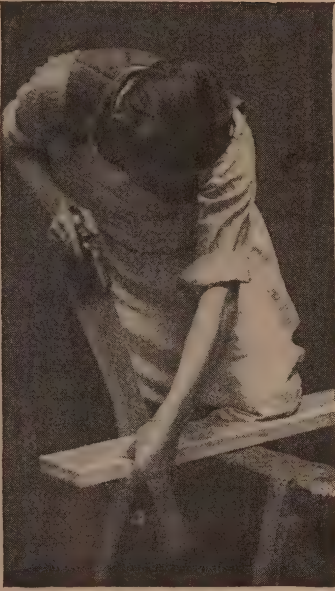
Method of Sawing End off Board to Prevent Splitting
